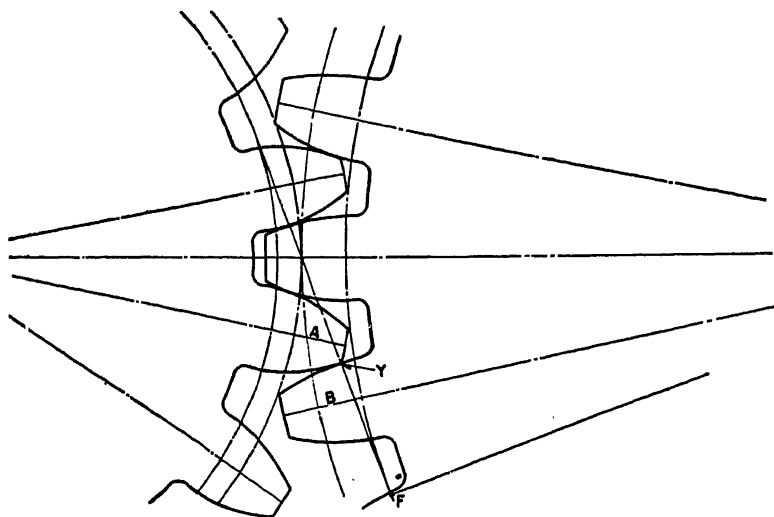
Gear Tooth Engagement—Conclusion of Action.
